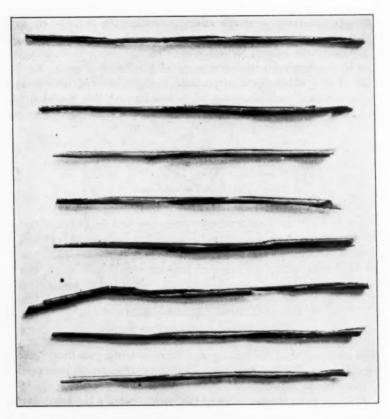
Steel Chips Milled From 0.57 Per Cent Carbon Steel Forging 18 in. Wide at the Rate of 47½ cu. in. Per Min.
